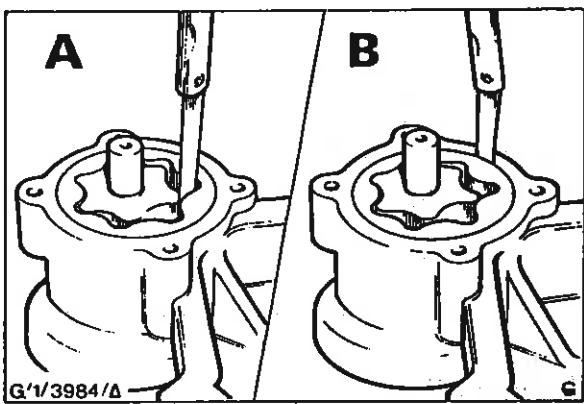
Measuring Rotor Lobe/Body Clearance
